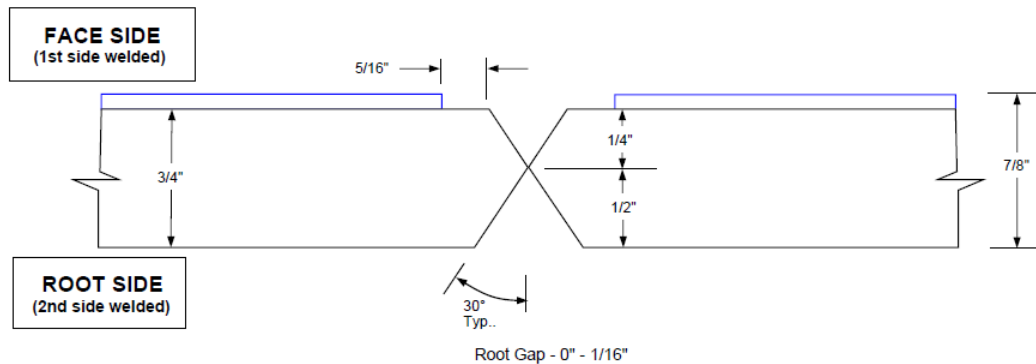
Welding geometry of the P91/Ni201 and P91/C22 butt welds. Face side is the top surface and root side is the bottom surface.
